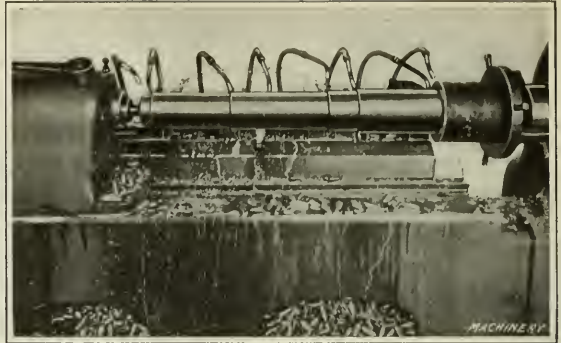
Tooling used for turning Spindles on Fitchburg Lathe
